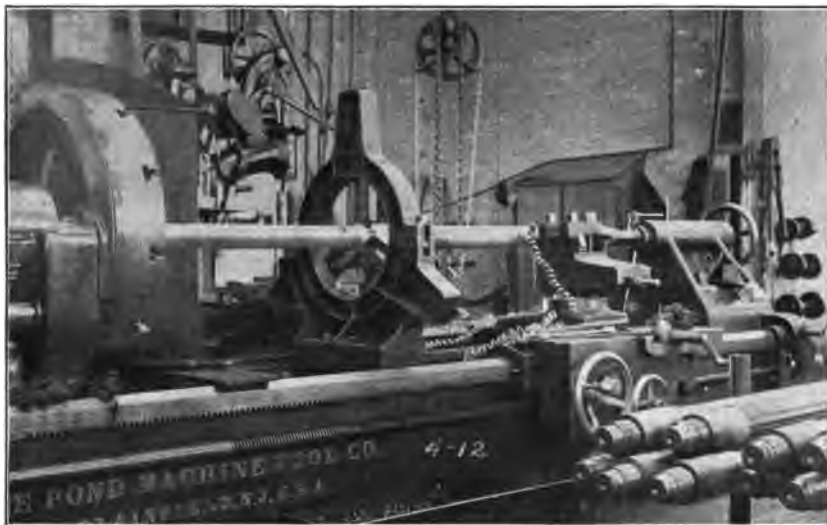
TURNING EXTENDED PISTON RODS IN LATHE EQUIPPED WITH HIGH-SPEED TOOLS AND APPLIANCES.
